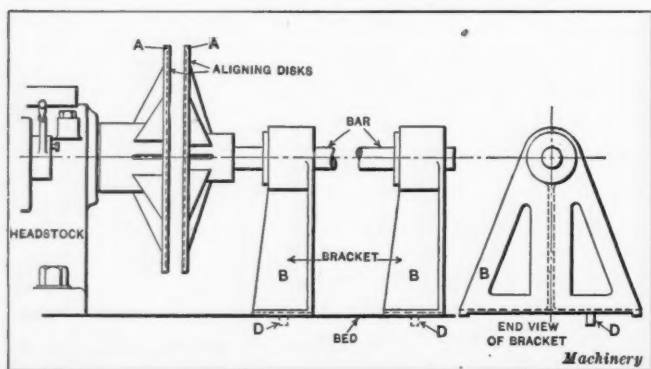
Spindle Aligning Tools used in testing Shell-boring Lathe
